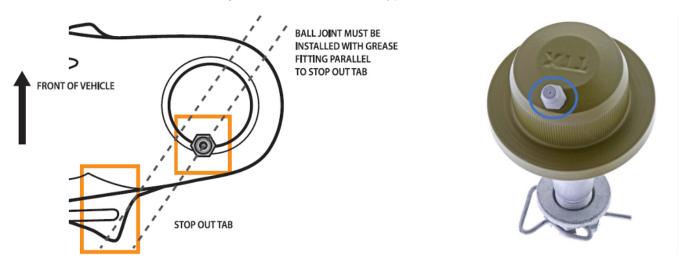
To ensure adequate clearance between components, ball joint must be installed with grease fitting parallel to lower stop out tab
